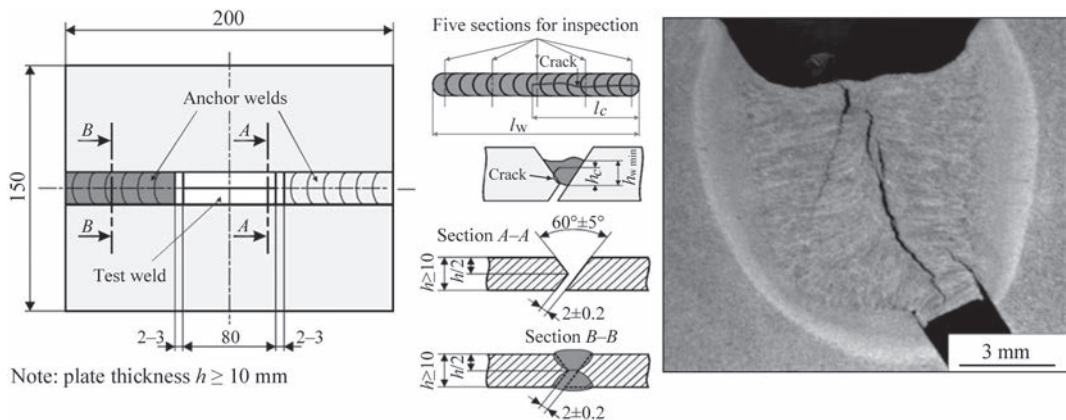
TEKKEN-Test: *a* — weld sample; *b* — welded Y-groove with cold crack, taken with permission by Springer Nature from ref. [9]
